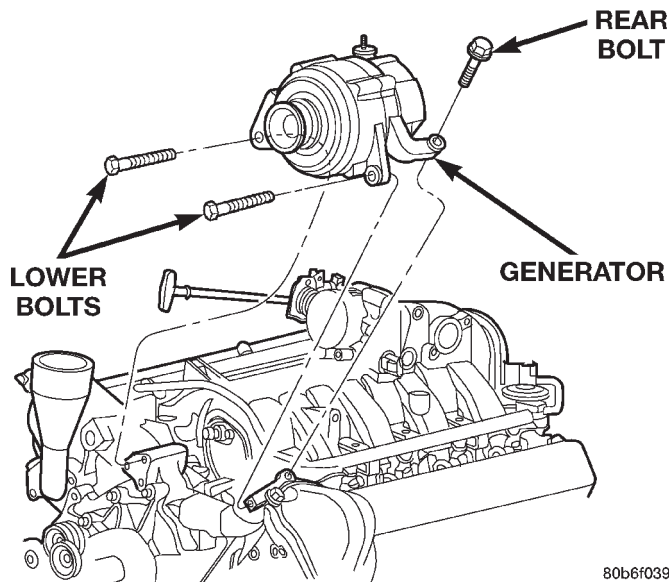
Remove/Install Generator—4.7L V-8 Engine
